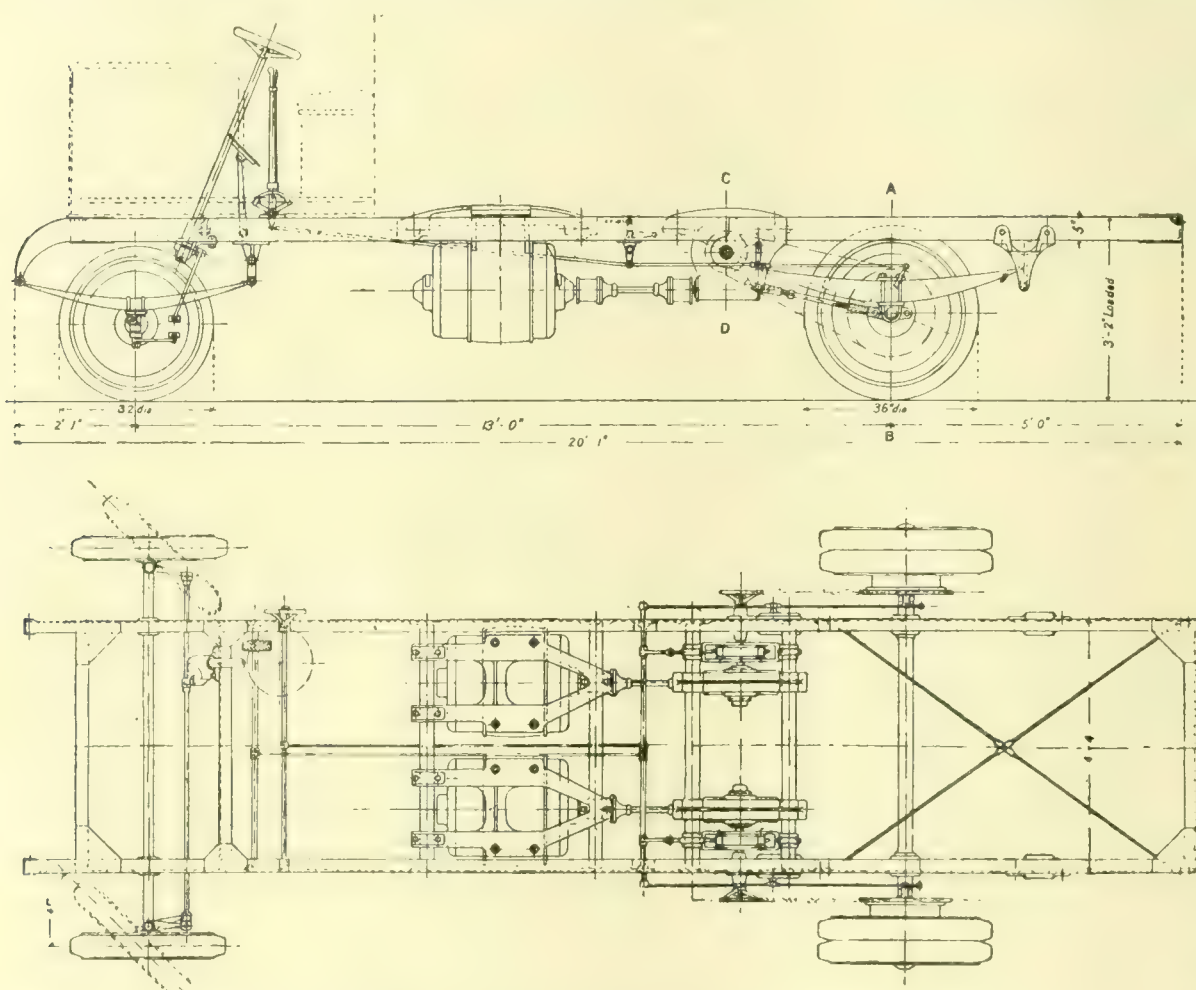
SIDE ELEVATION AND PLAN OF CHASSIS OF RAILLESS TROLLEY CAR.
